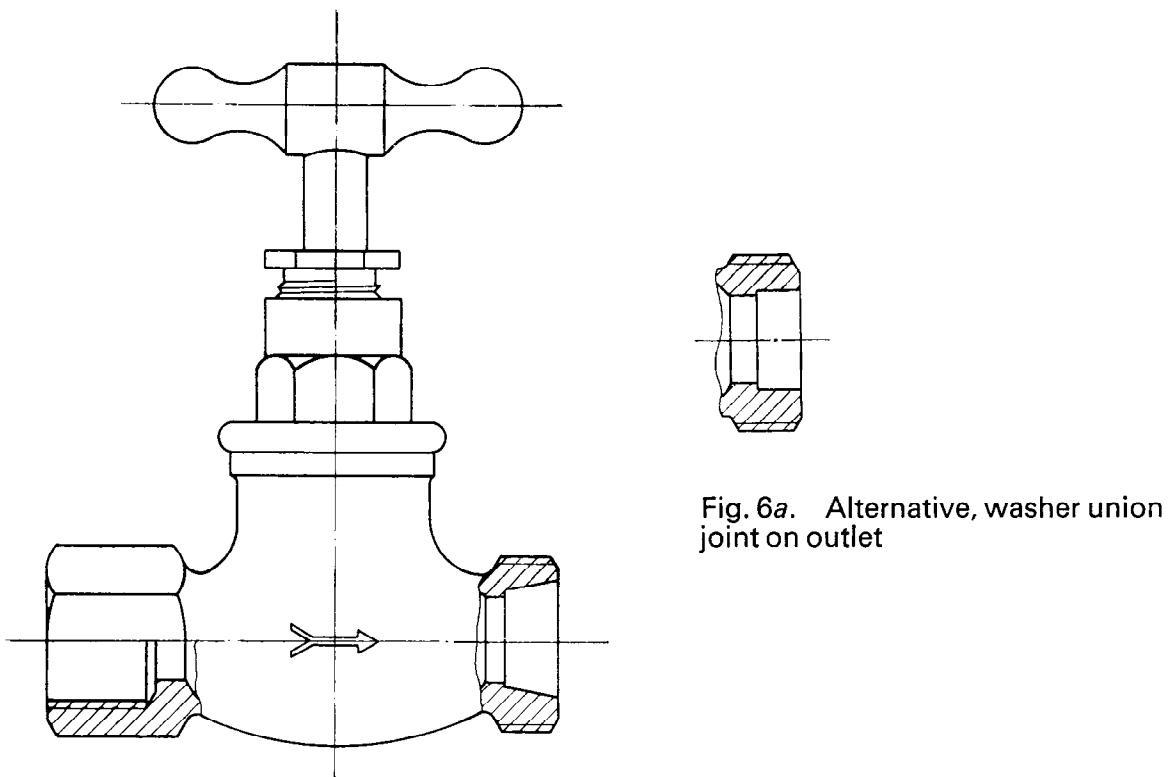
Stopvalve with BS pipe (parallel) internal thread on inlet, conical union joint on outlet
